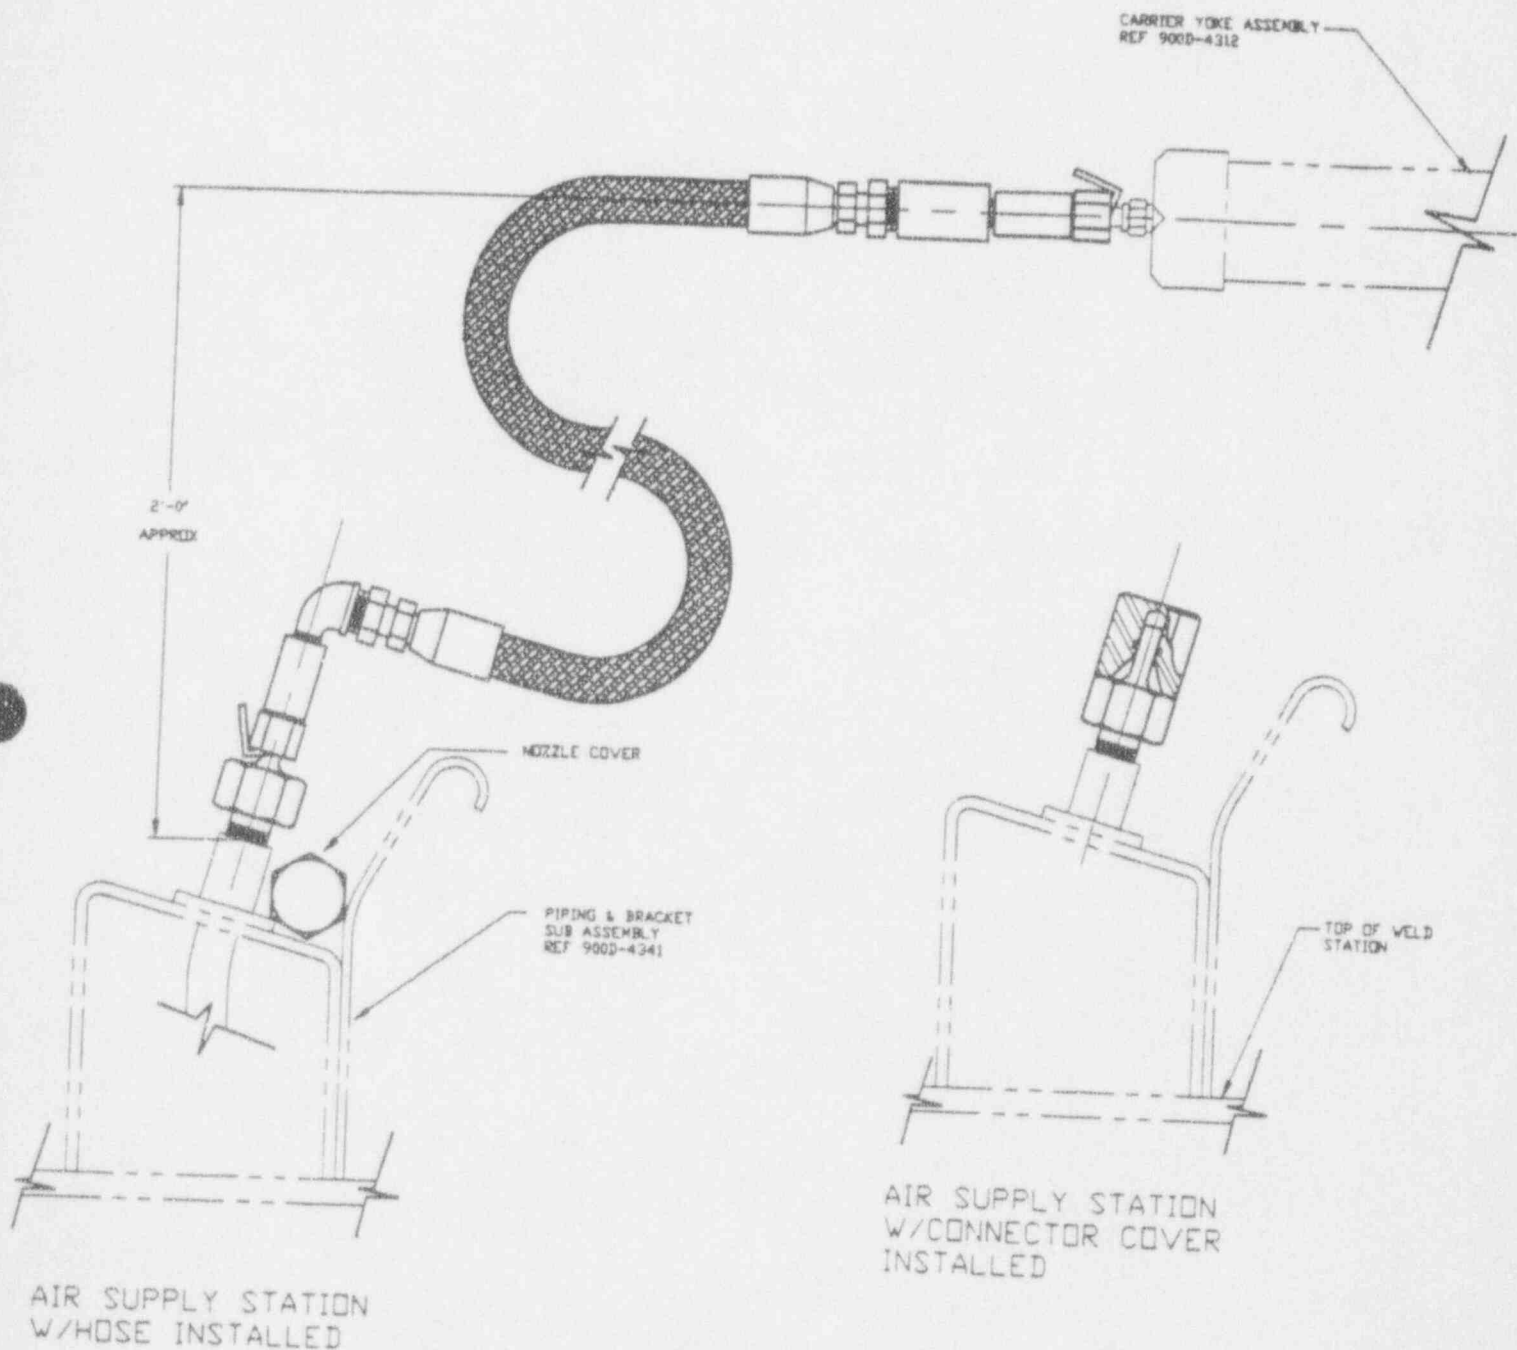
Hose Assembly Attached to a Quick-Connect Nozzle
